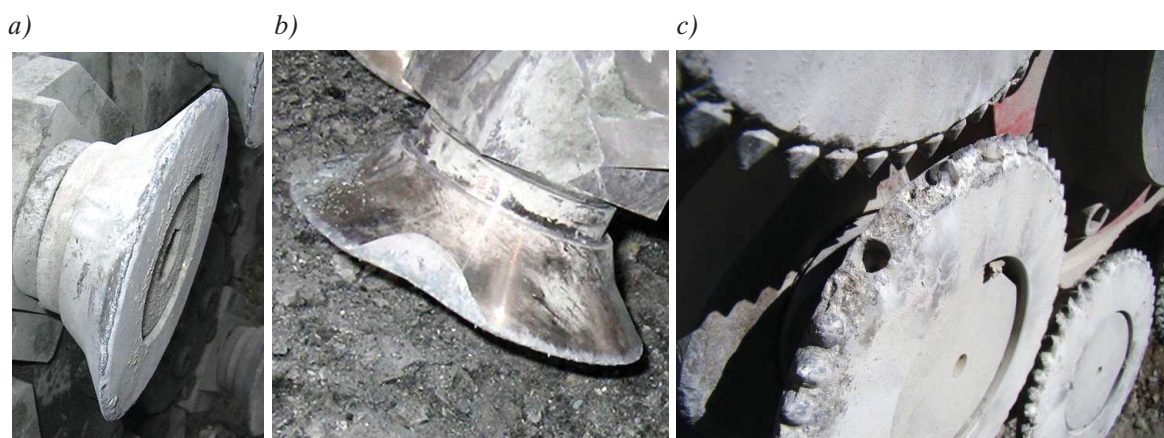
View of wear of disk tools after mining tests: a) mounted under -5° angle; b) mounted under 90° angle; c) armored with carbide inserts [2]
